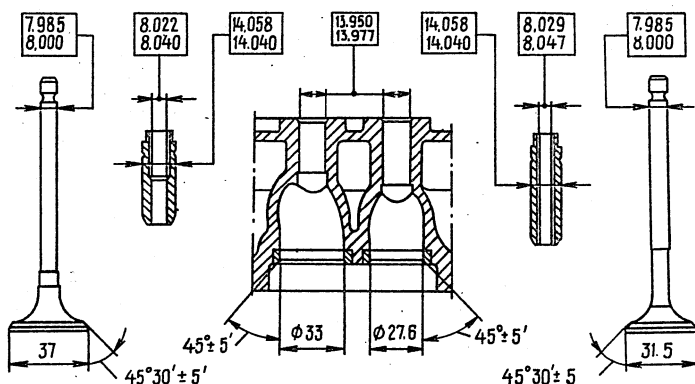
Basic Dimensions of Cylinder Head, Valves and Valve Guides
